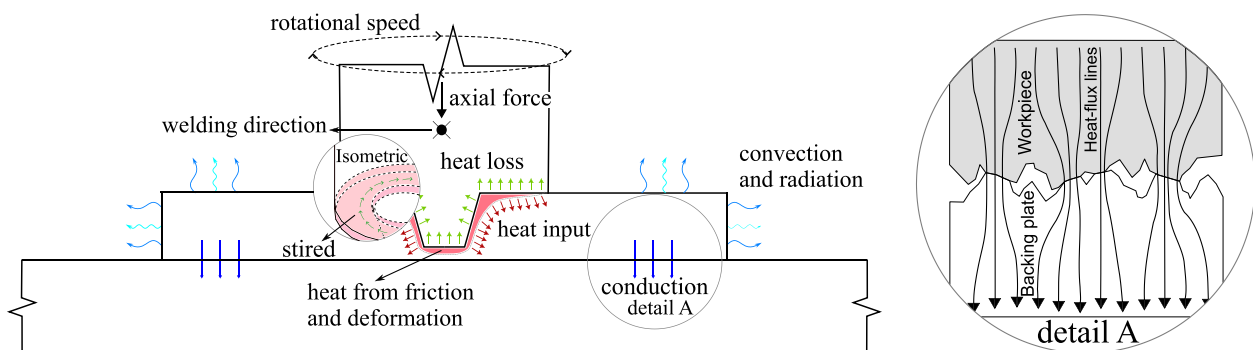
FSW scheme and contact conduction between the workpiece and the backing plate
